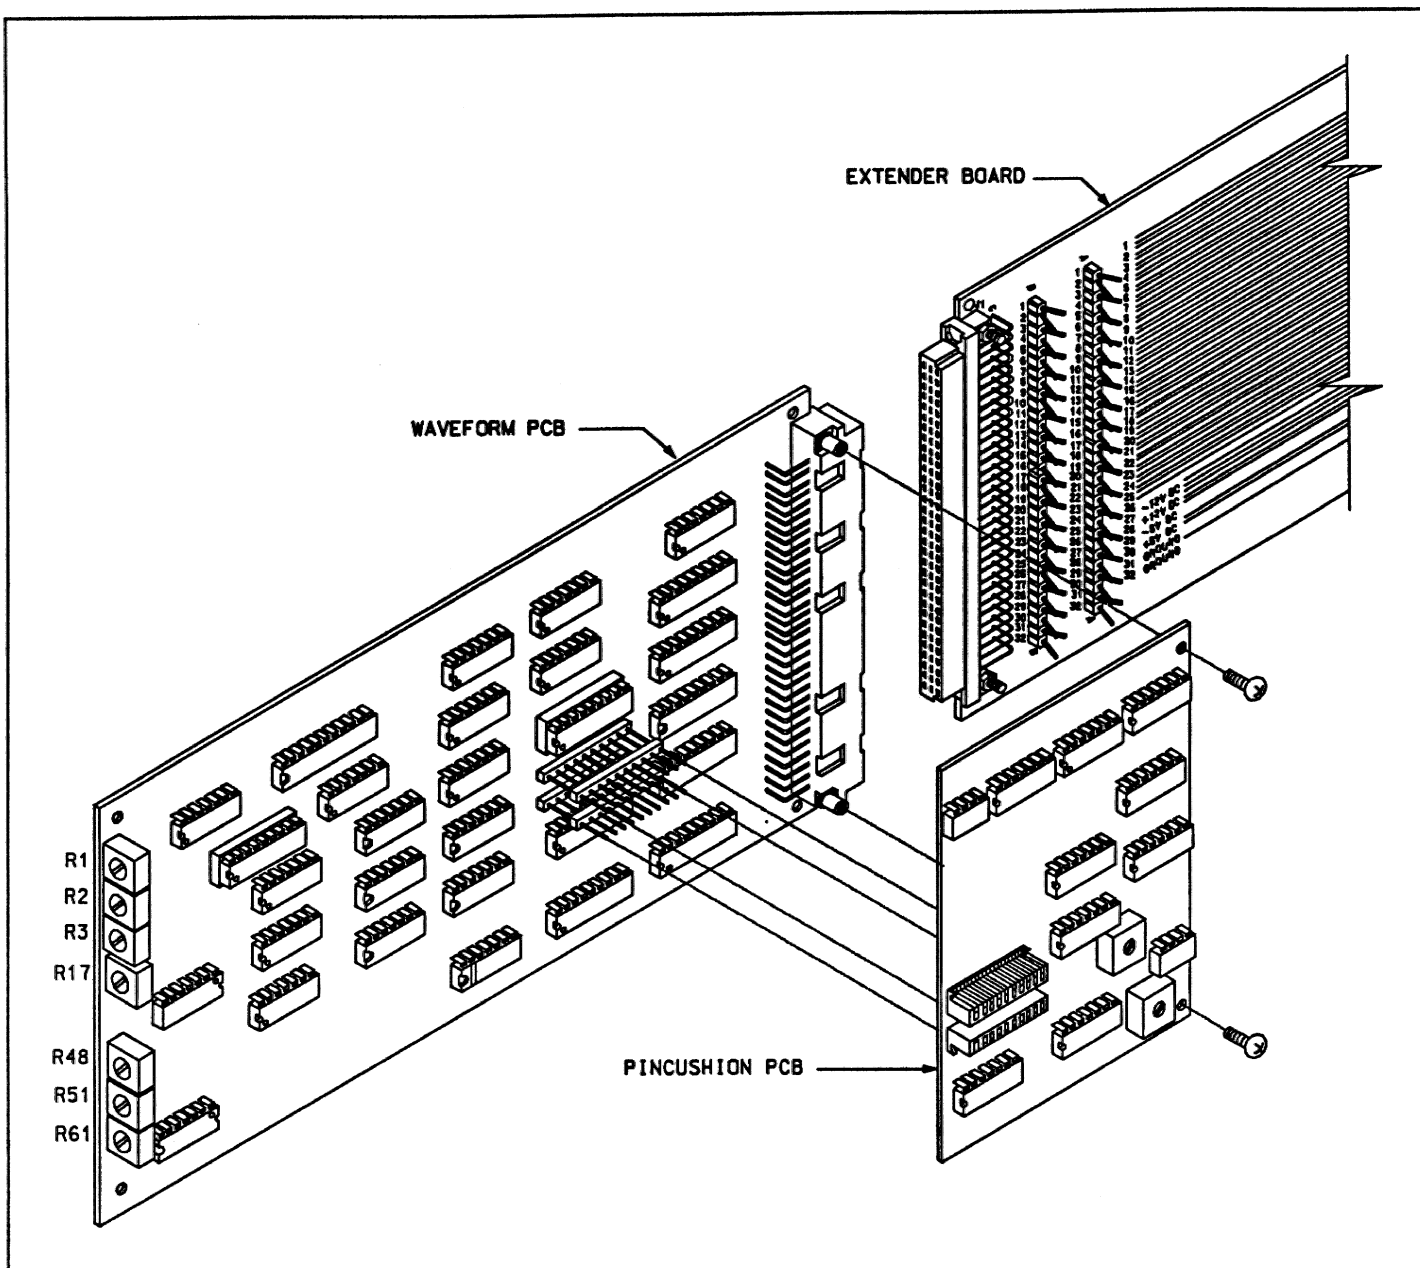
Waveform Module Alignment/Pincushion PCB Removal
